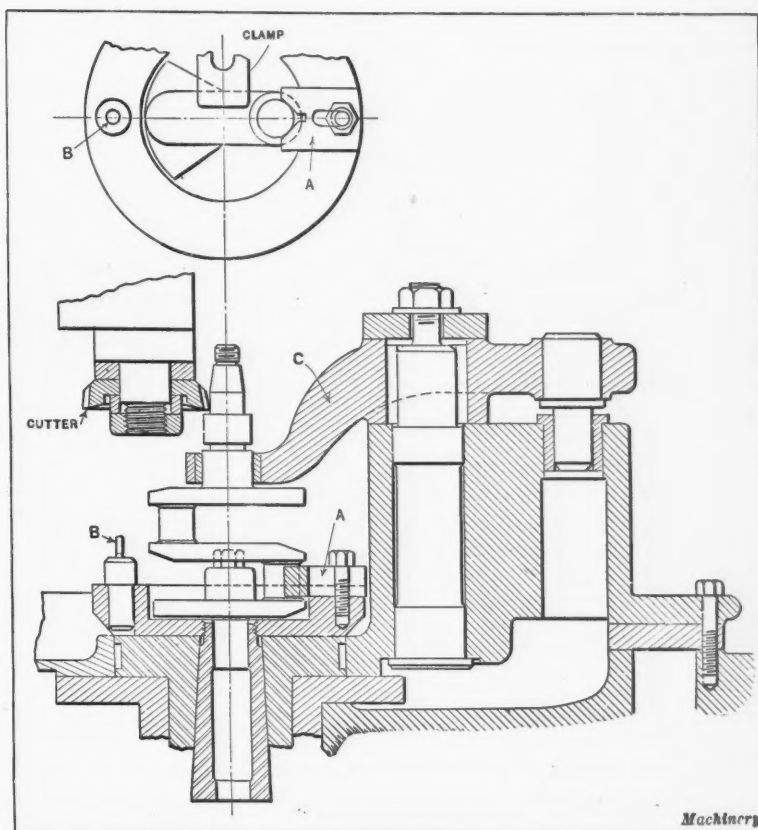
Method of holding Crankshaft while cutting Gear Near Upper End
